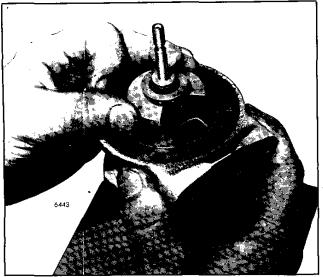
Installing Thrust Collar and Thrust Bearing into Center Housing
